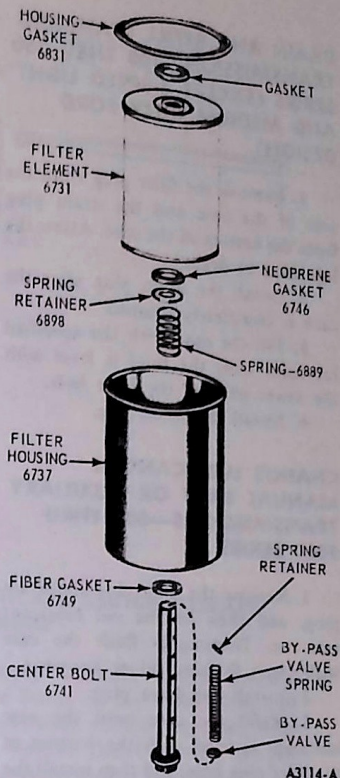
Typical Replaceable Element—Type Oil Filter Assembly
